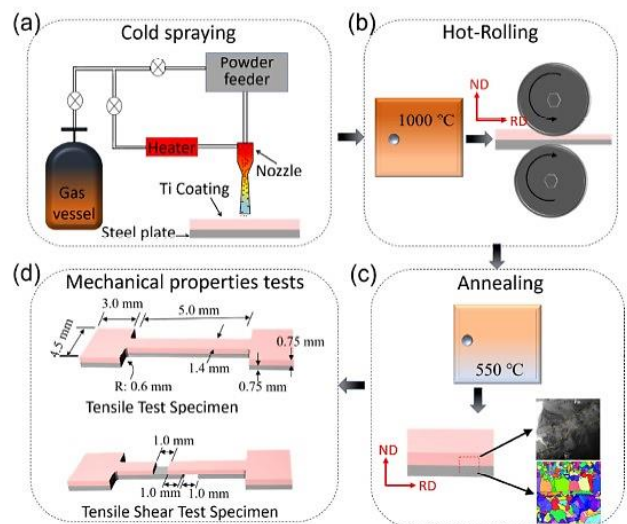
Schematic representation of (a) cold spraying of Ti on steel plate, (b) hot-rolling process, (c) annealing process, and (d) sample dimensions for tensile and shear tests.
